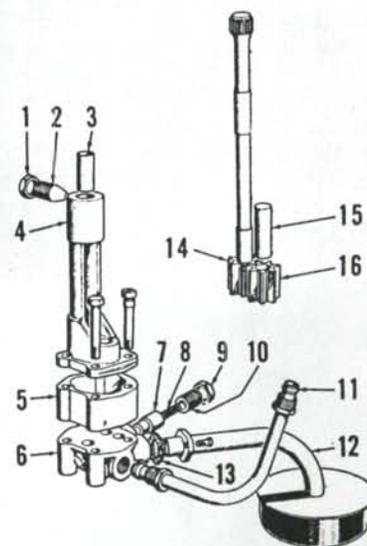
Exploded view of oil pump used on three-cylinder engine showing component parts and their relative positions.
